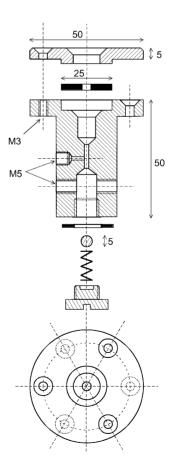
Detailed drawing of the injection head. Dimensions are given in mm; M3, M5, dimensions of threads.
